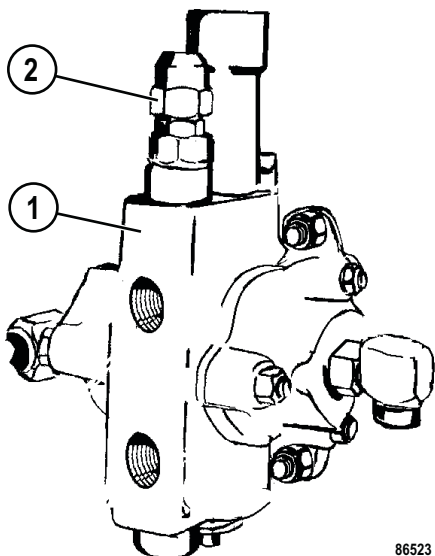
HOIST PILOT RELIEF VALVE
